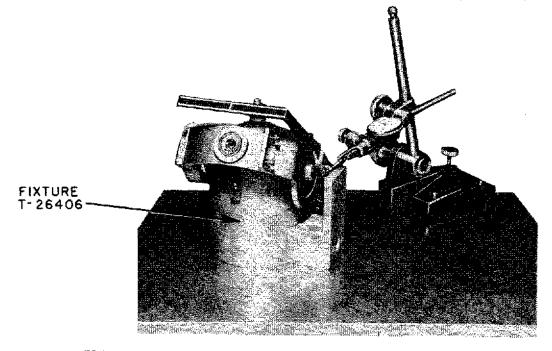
INDICATING THE CAGING ARM. TOLERANCE, .001 INCH (GYRO-HORIZON WITH CAGING DEVICE)
